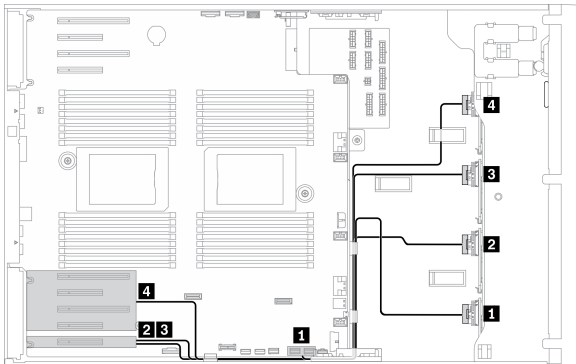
SAS/SATA cable routing to system board and bottom PCIe zone
